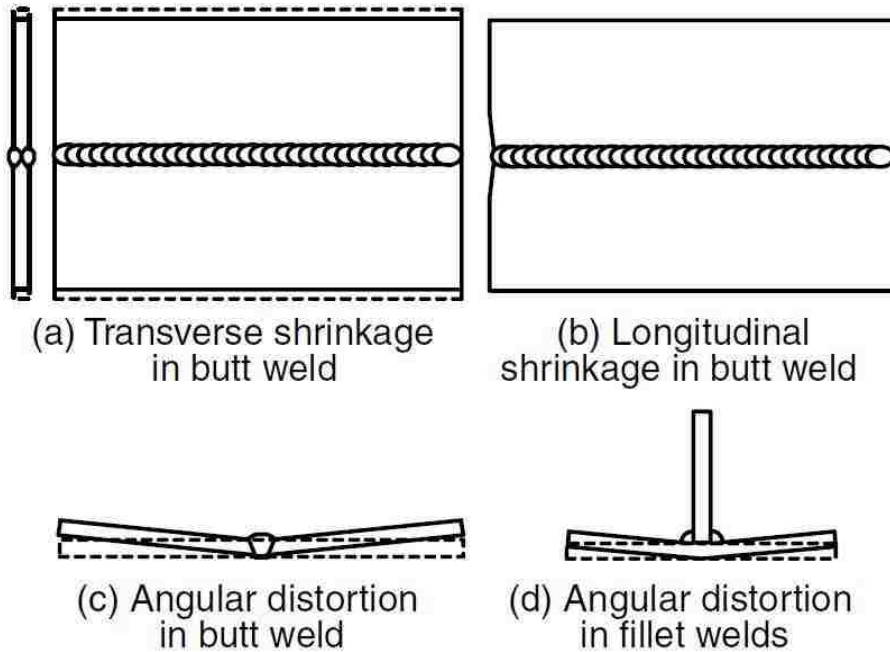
Typical distortion in welded parts. Reprinted from Kou [14]
